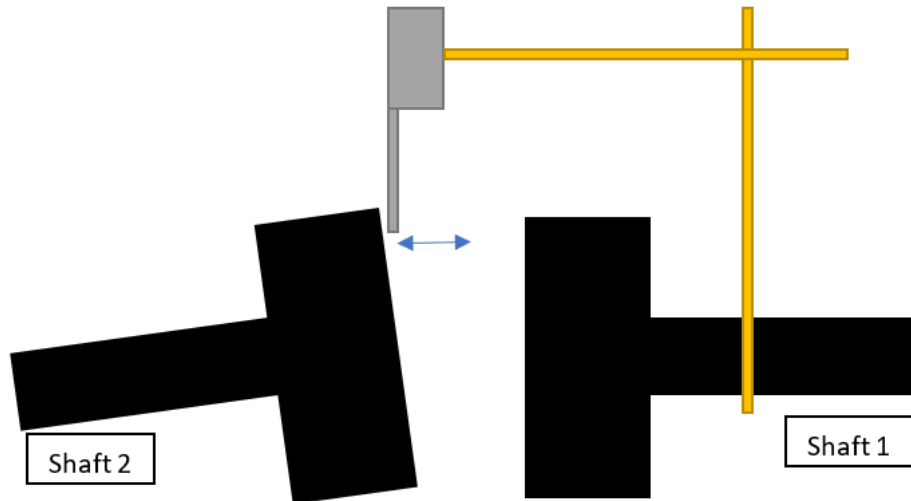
MEASURING TECHNIQUE FOR ANGULAR MISALIGNMENT IN STARTING POSITION
